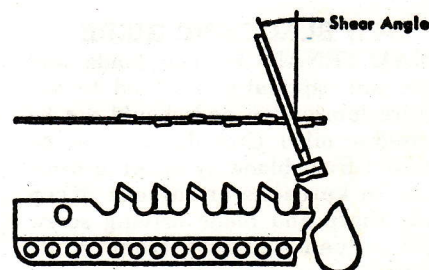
Up to 30° shear angle may be used to prevent tooth breakage in extremely hard wood; or to provide a smoother finish cut in plywood. Refer to text.
